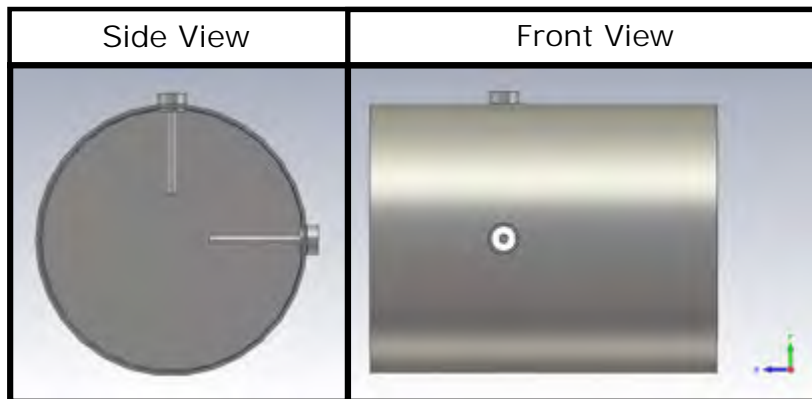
Built waveguide CAD design. (Left) Front view. (Right) Side view.
